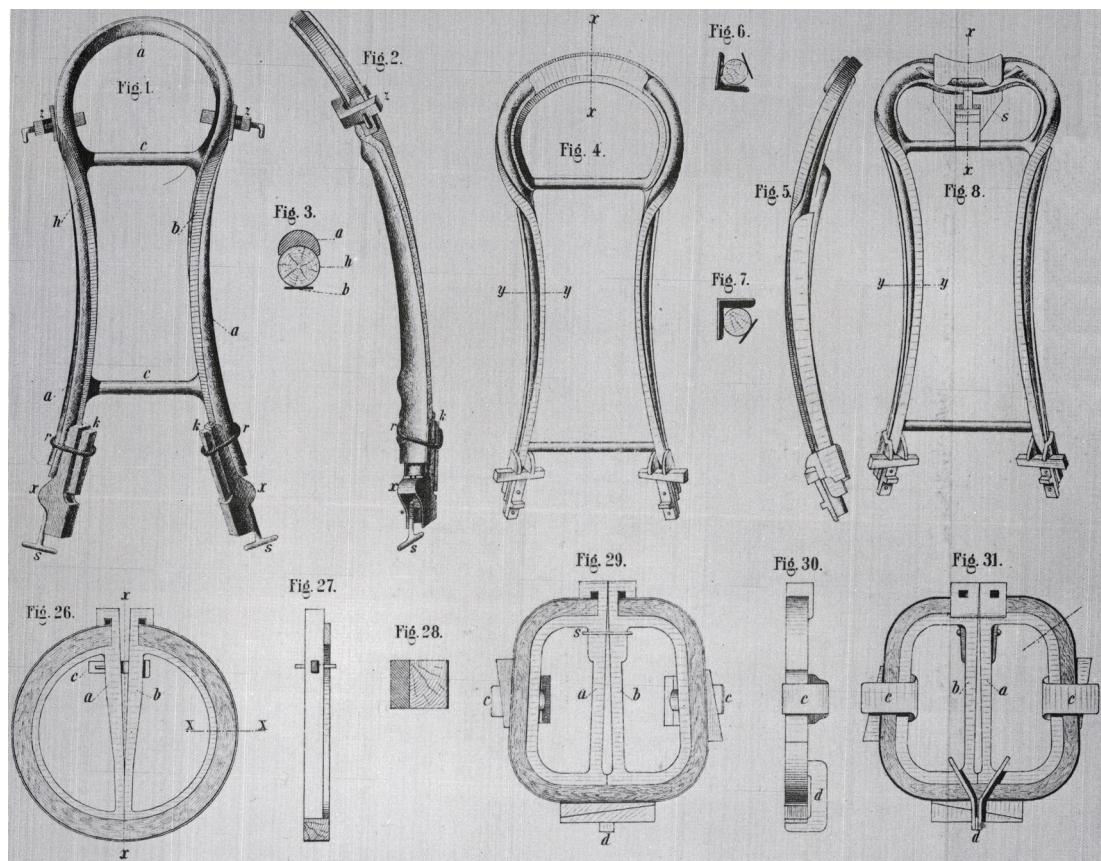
Iron moulds (produced by sand casting) for wood bending (Source: Wilk, 1980a, pp. 25–26)
